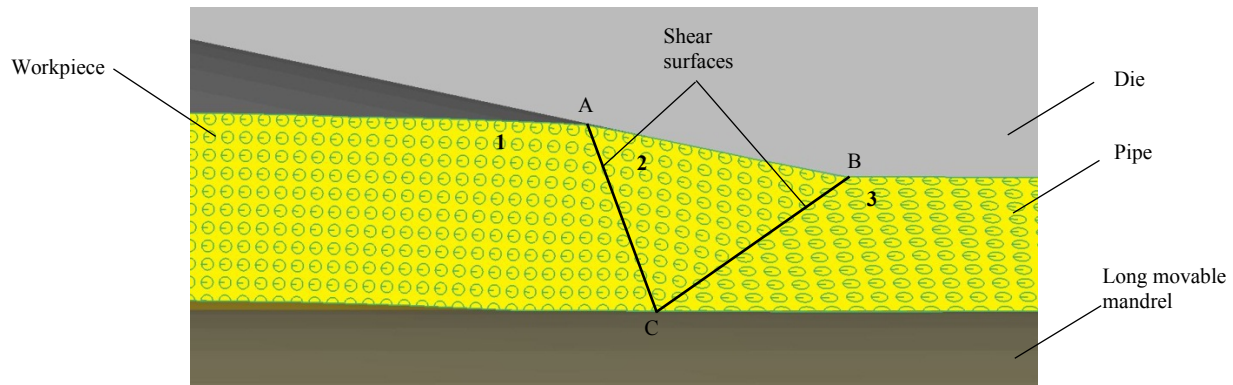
Deformation zone scheme for pipe drawing on a long movable mandrel.
